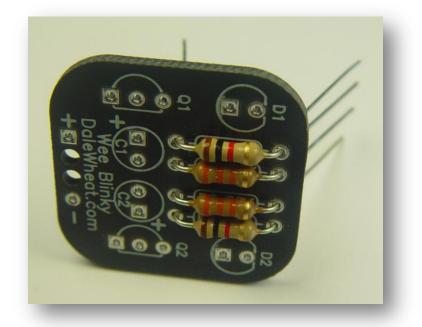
Insert the resistors into the PCB. Make sure you put the right resistor in the right place.
